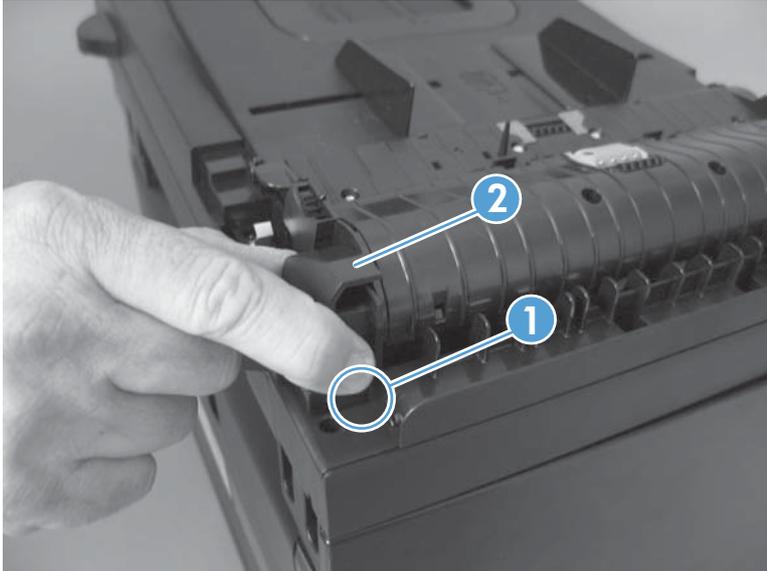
Remove the document feeder pick arm assembly (4 of 4)
